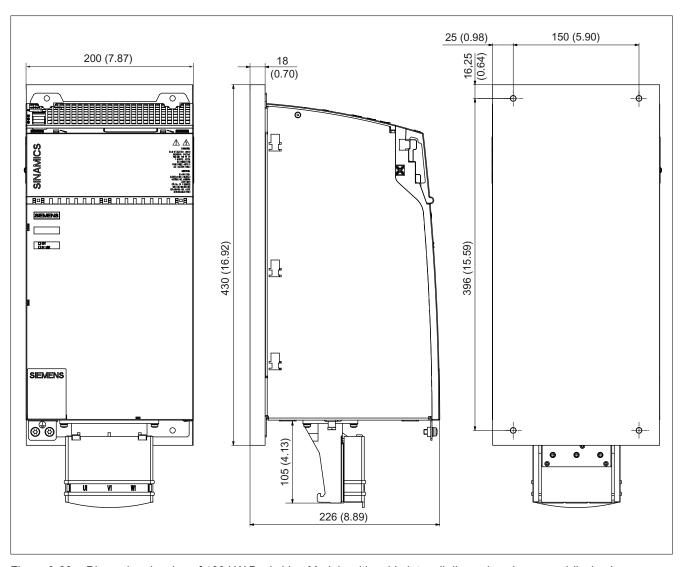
Dimension drawing of 100 kW Basic Line Module with cold plate, all dimensions in mm and (inches)
